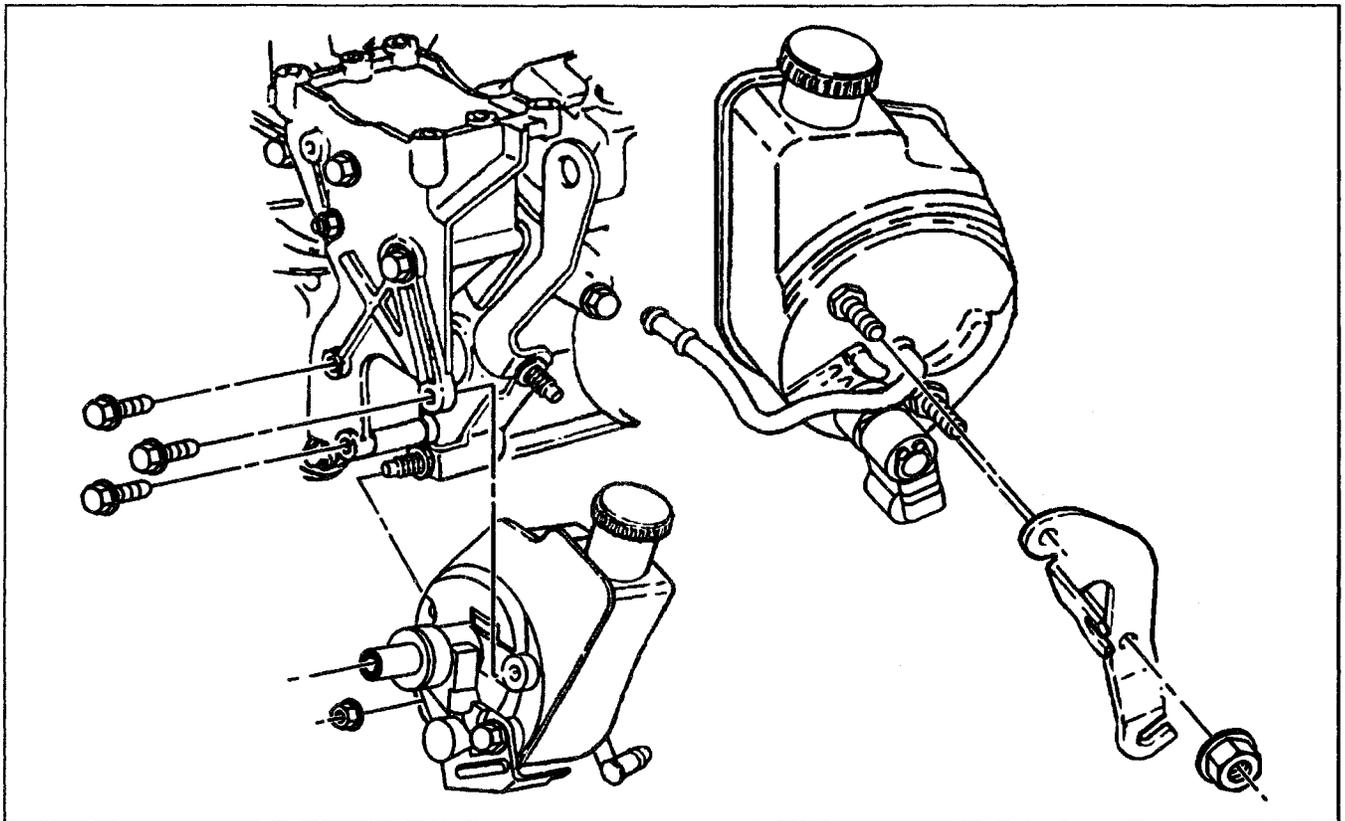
Power Steering Pump Mounting (4.3L, 5.0L, and 5.7L Engines)
